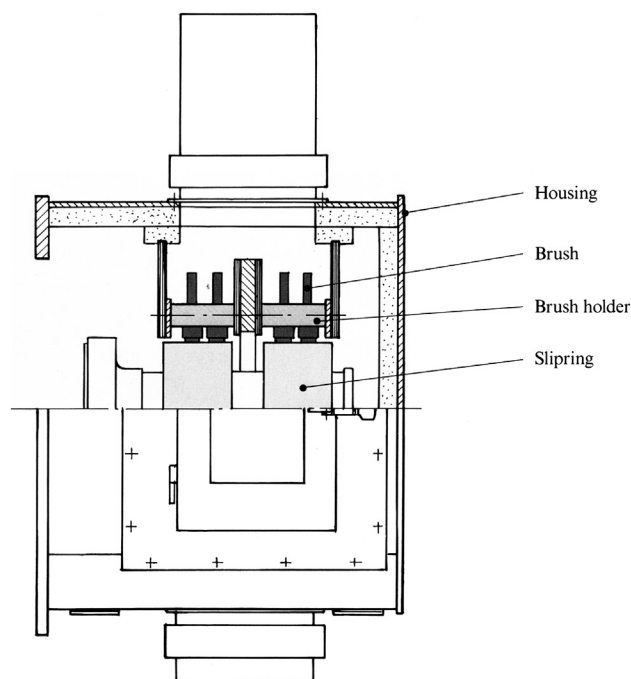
Slipring assembly detail. (Source: Alstom Power.)
